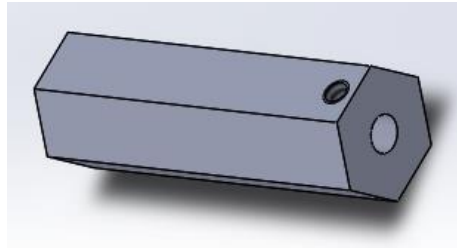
The hexagonal aluminum shaft used to connect the motors and wheels
